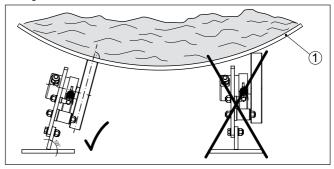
Impeller of the tachometer, vertically to the conveyor belt
